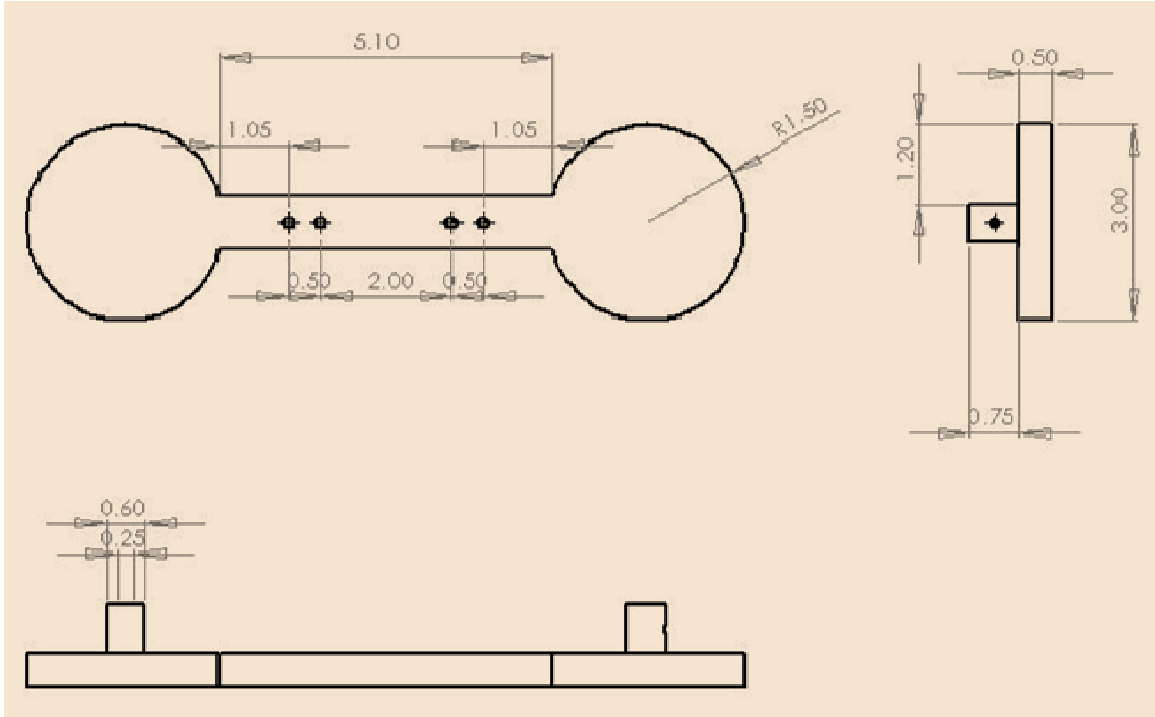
Motor cross arm that is coupled in the center to the motor/linear actuator. At the two ends it is connected to stainless steel rods. All dimensions in inches.
